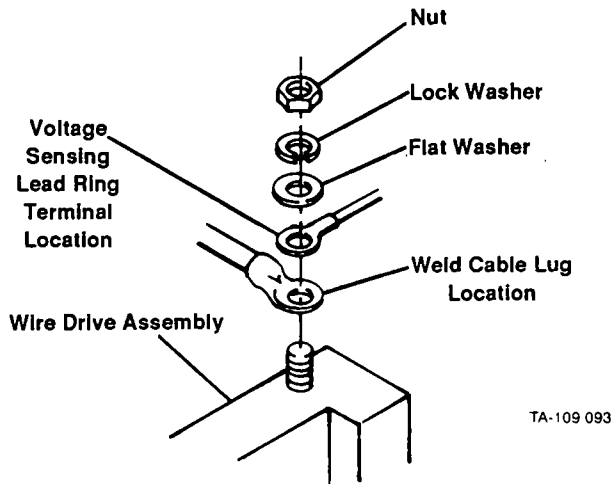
Voltage Sensing Connections At Wire Drive Assembly
